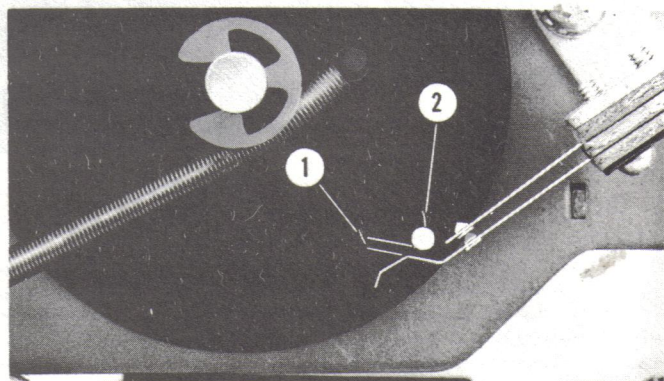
KEY SWITCH CLEARANCE ADJUSTMENT
